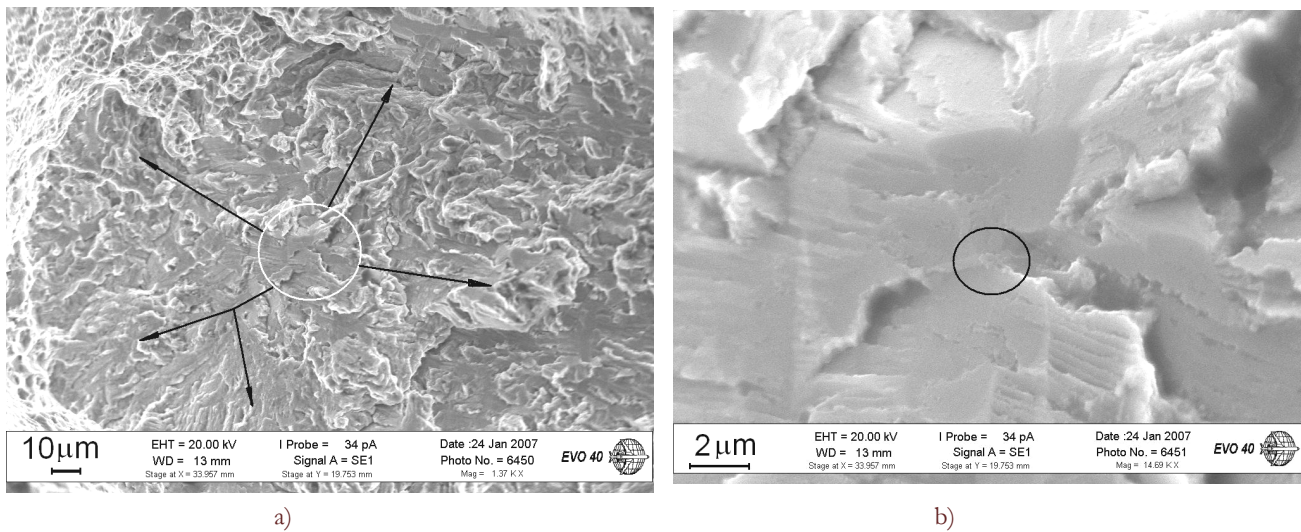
(a) TP-specimen fracture surface with a subsurface origin; (b) presented under different magnification. Area of origin placed inside of the circle. Smooth facet in (b) is area of the first step of crack initiation by the α - phase.
